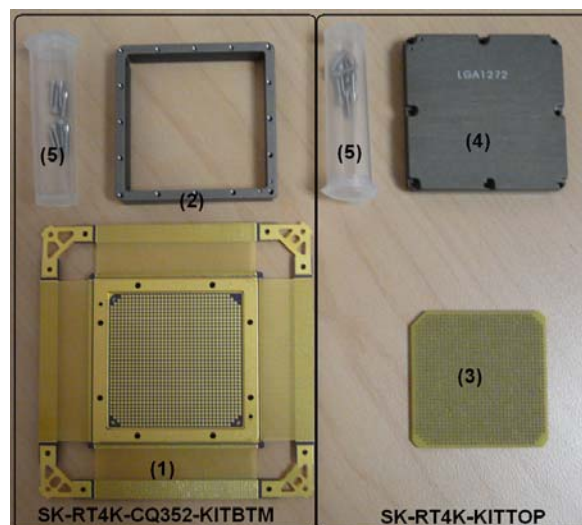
• Parts of CQ352 to LG1272 Adapter Socket: (1) Ceramic Adapter, (2) Socket Housing, (3) Socket Lid, (4) Socket Interposer, (5) Fixing Screws
